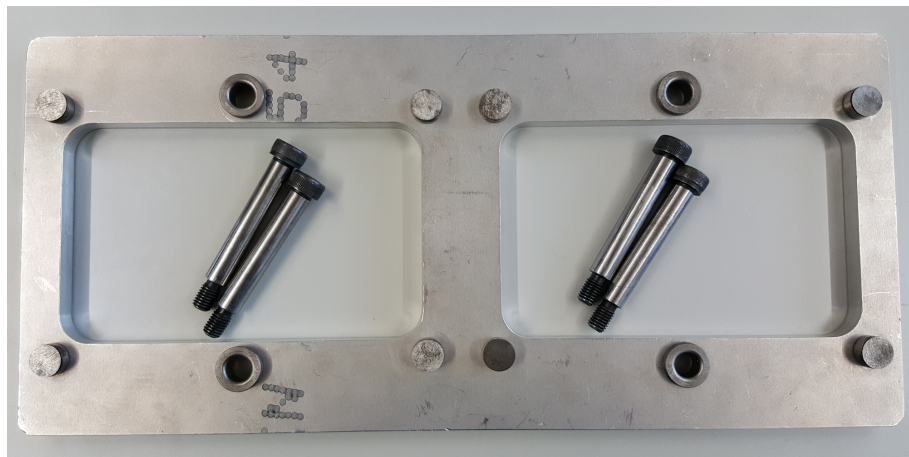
Set-plate to align two consecutive elements of the end-effector parallel to each other by inserting the four shoulder bolts into the fixing collar bushings on the sides of each element and the set-plate.
